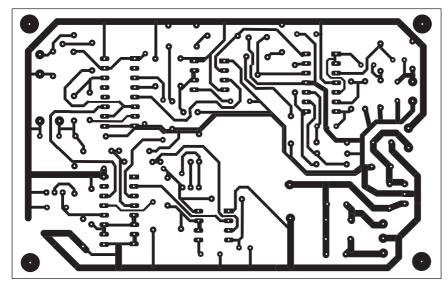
Actual-size, single-sided PCB layout for the circuit
